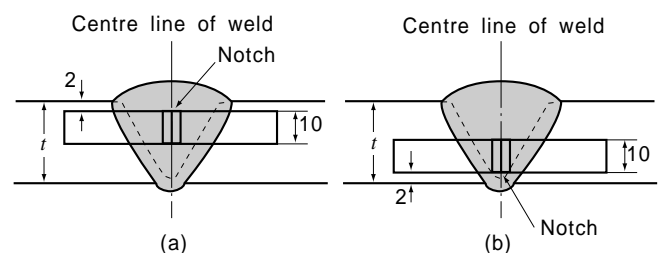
Position of Impact Test Specimen for Butt Weld with One-run and Multi-run Technique (Unit: mm, t = Plate thickness)
